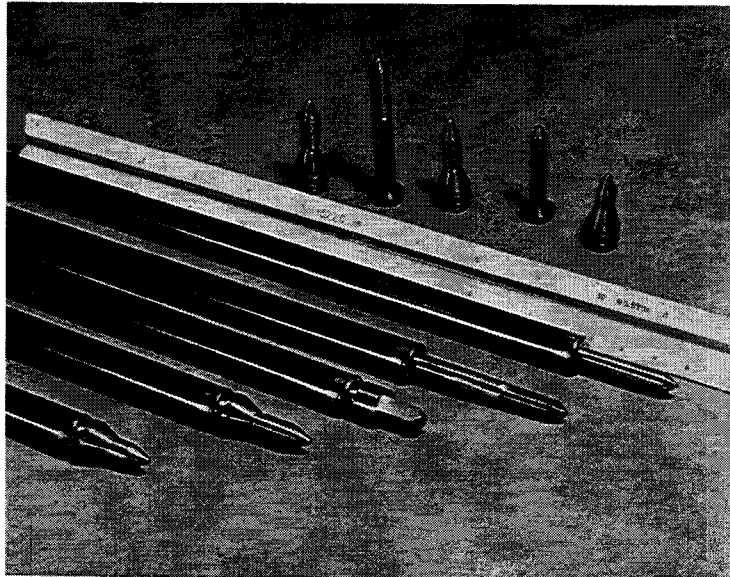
Typical End Plugs and Welded Tube Ends
